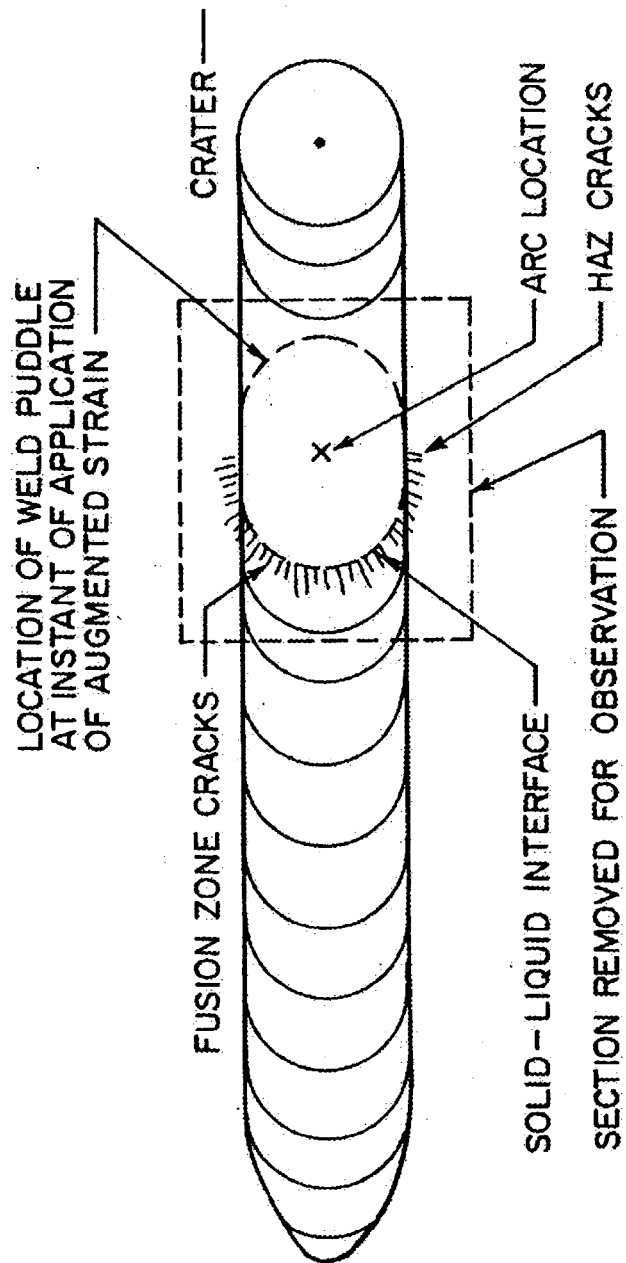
Schematic representation of the top surface of the weld showing location of the arc, weld pool and solid-liquid interface at the instant of straining [68]
